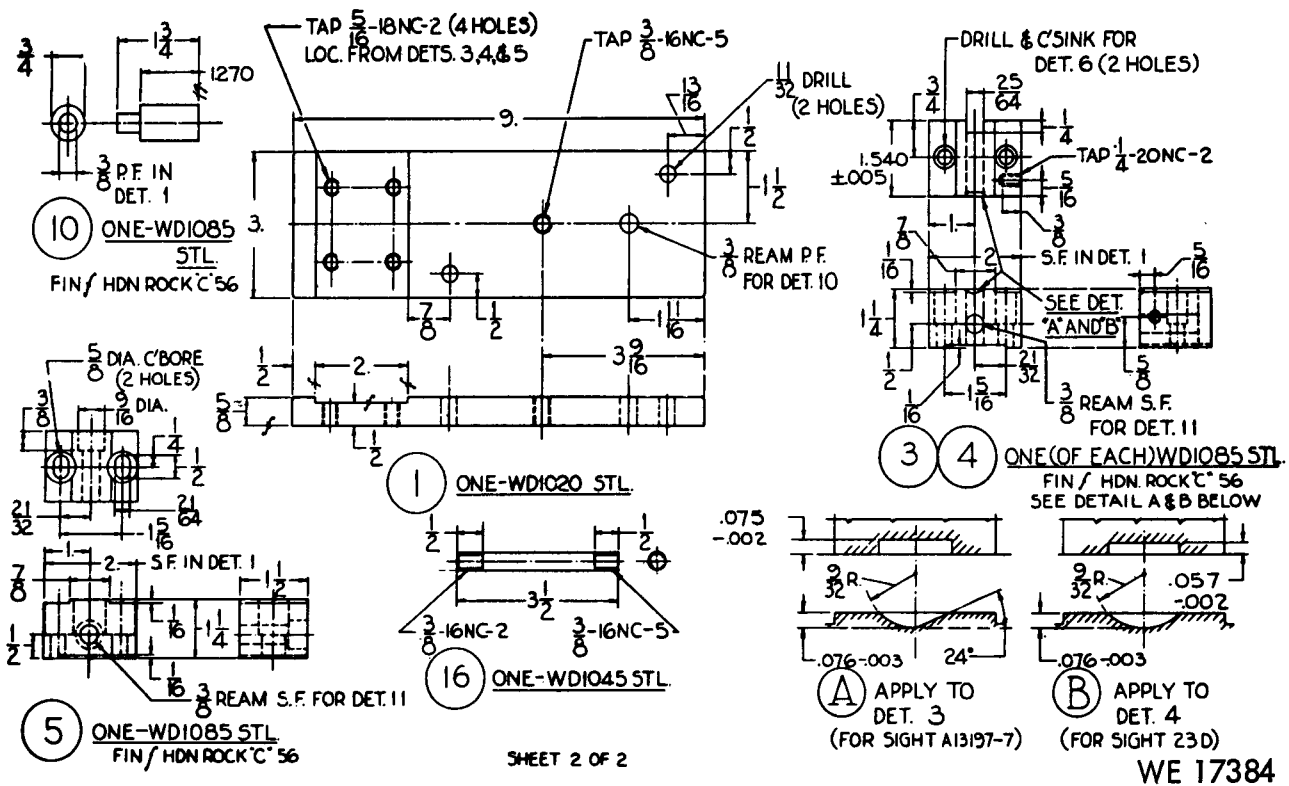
Improvised fixture for riveting front sight. (2 of 2)
